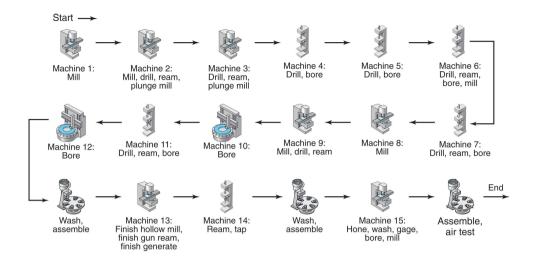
A large transfer line for producing engine blocks and cylinder heads.
